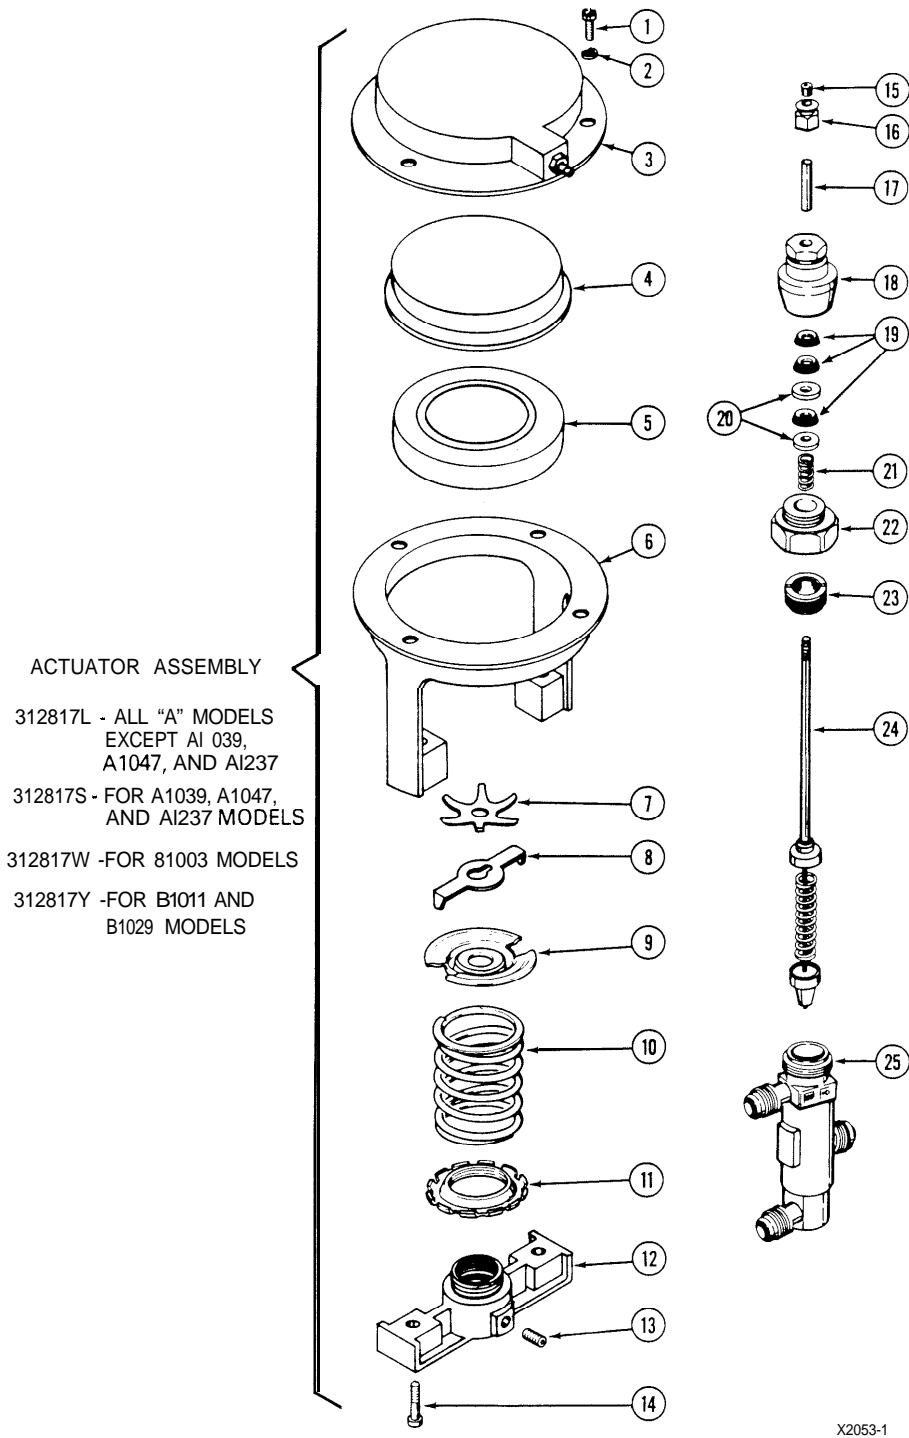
VP522A and B Exploded View (SeeTable 3).
